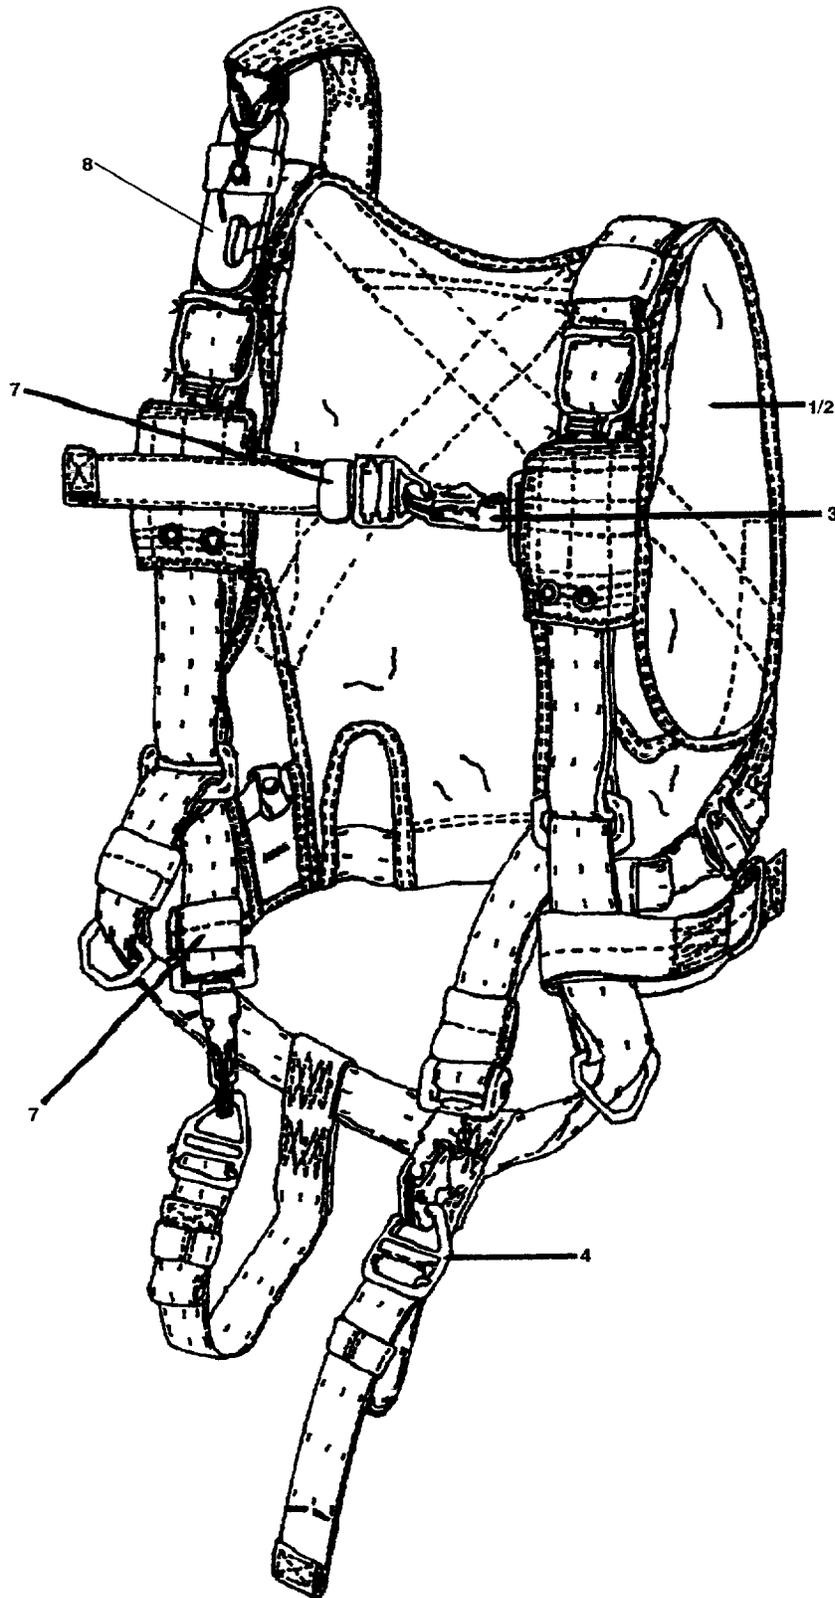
Crew Restraint Harness Assembly (Sheet 1 of 4)
